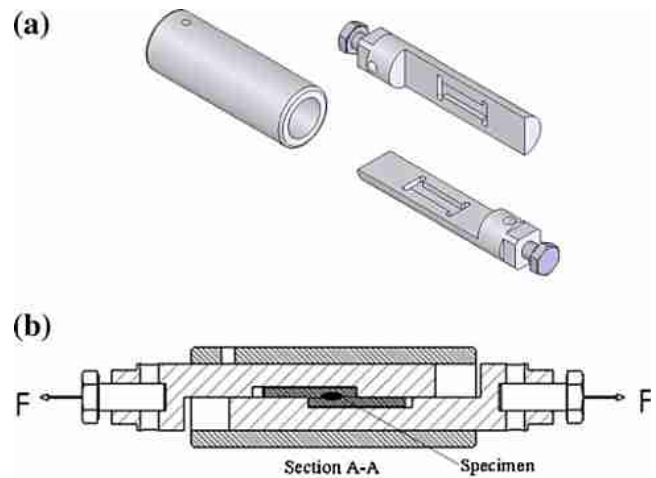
Shearing tensile test device and shearing tensile test specimen: a three-dimensional model for device, b sectional view of shearing tensile test device
